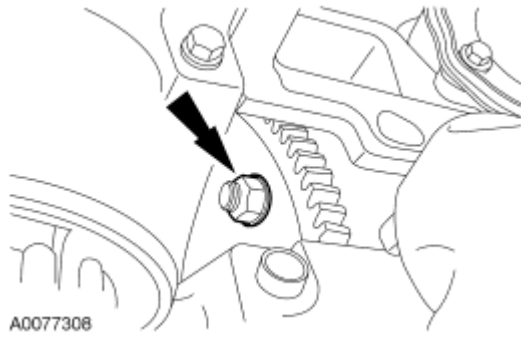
Locating Torque Converter-To-Flexplate Nuts
